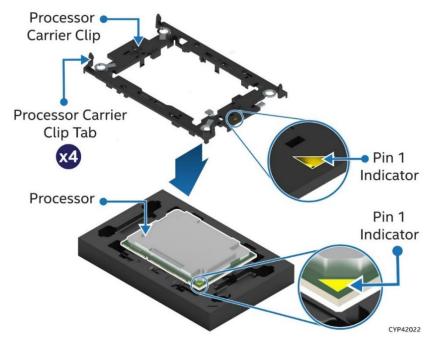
Installing Processor Carrier Clip onto Processor - Part 1
